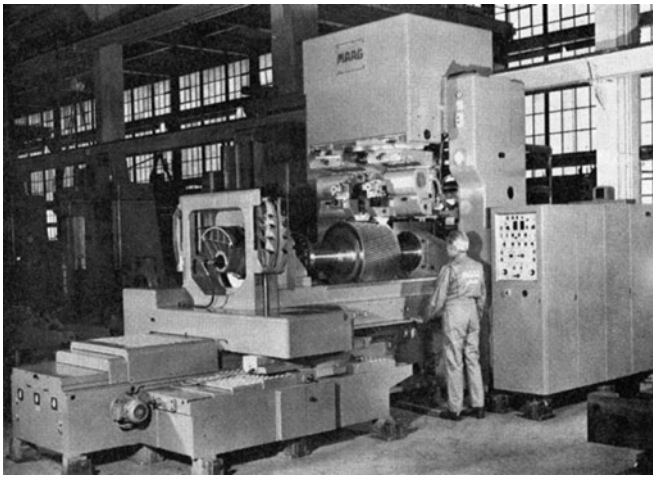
Generating grinder using two saucer-shaped wheels on a single-helical gear. (Courtesy of Maag Gear Wheel Co., Zurich, Switzerland.)
